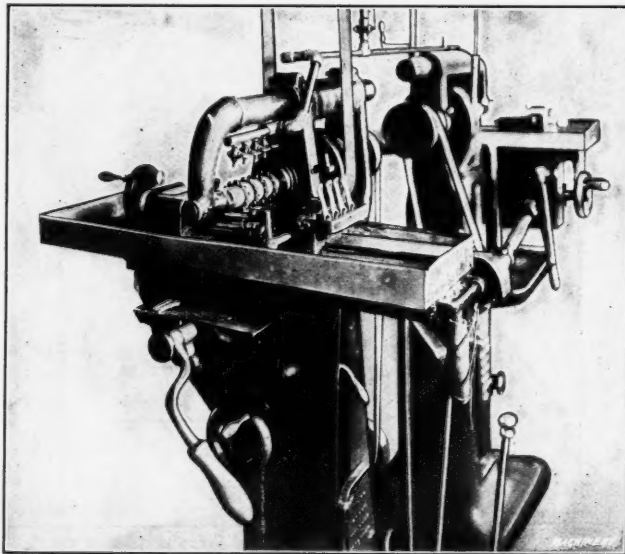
Galvanized Iron Pan applied to Milling Machine Table to increase Chip Room
